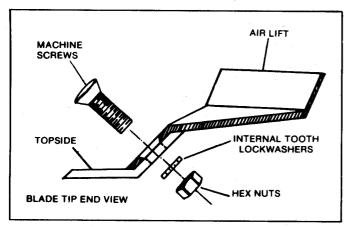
AIR LIFT ASSEMBLY DETAIL
